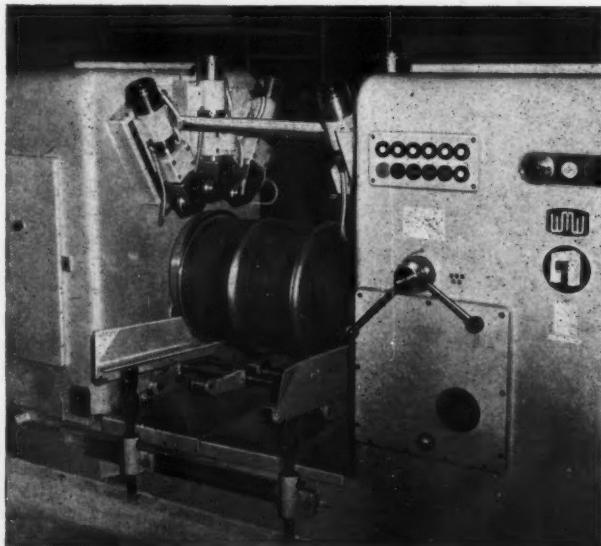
Hydraulic rams advance large discs to grip the ends of drums to be closed on this special rolling machine. Closing is then performed by means of rollers on rams mounted on the inner faces of the two housings
